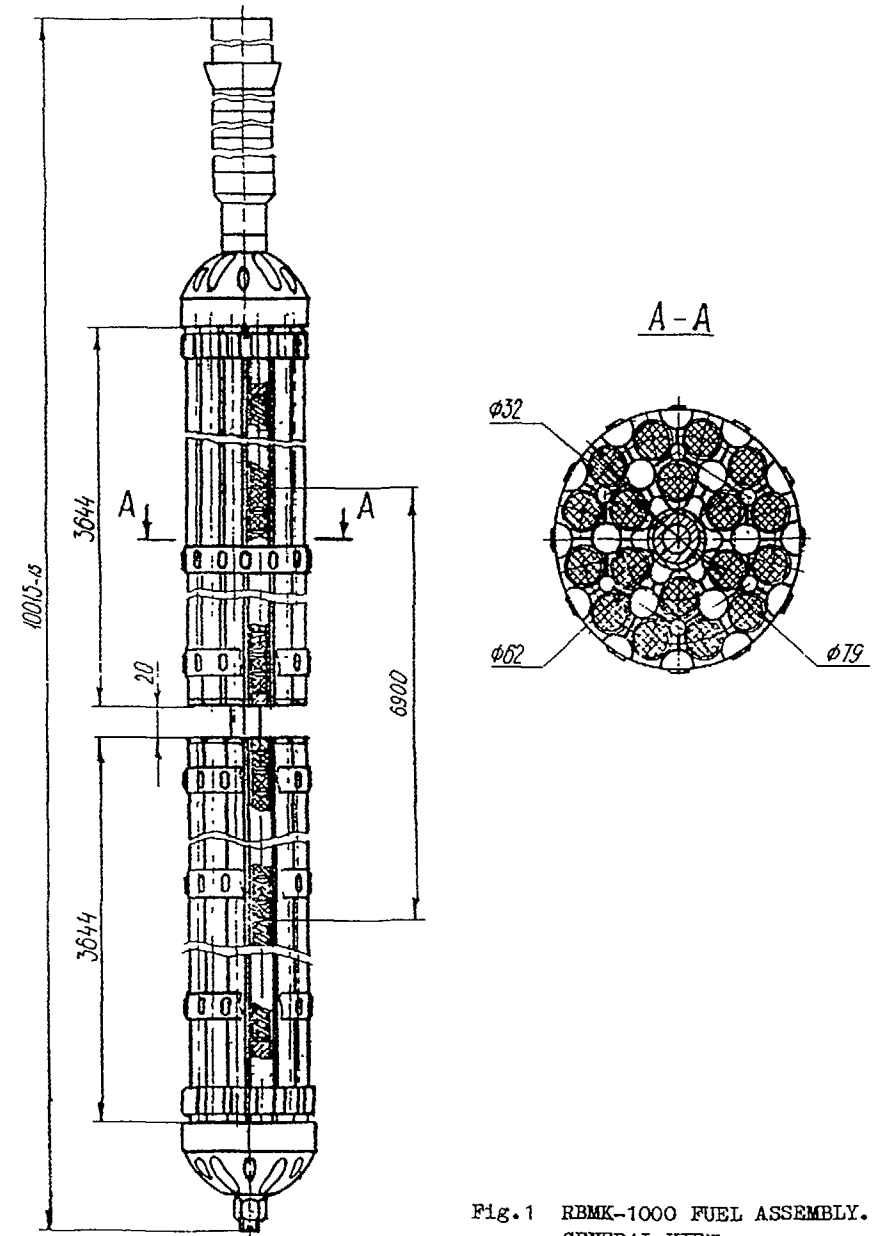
RBMK-1000 FUEL ASSEMBLY.
